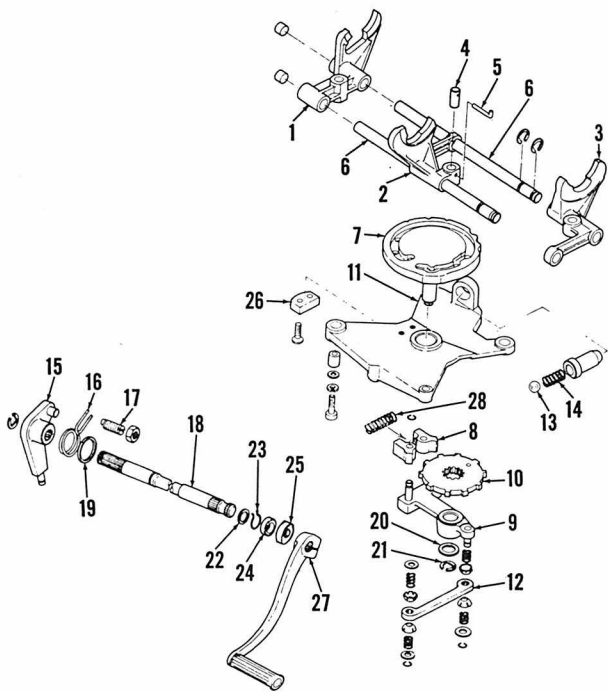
Cross sectional view of the shift assembly. Refer to Fig. Y5-25 for legend.
